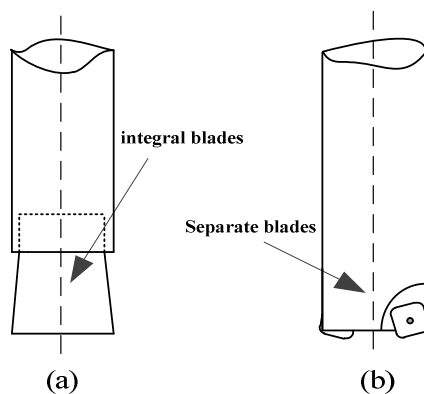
Two types of plunge milling cutter (integral blades and separate blades)
